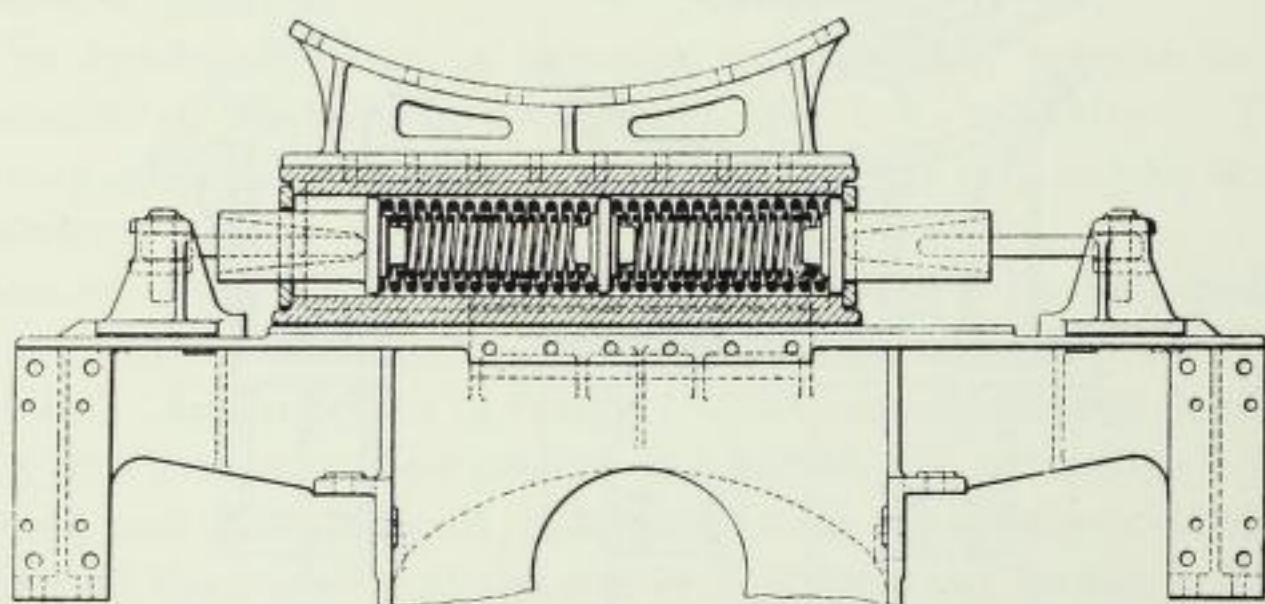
Spring Centring Device (American Locomotive Co.).
